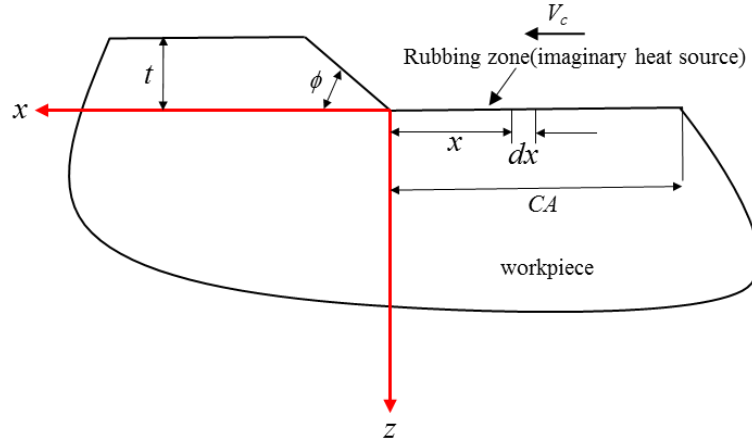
Heat transfer model in the tool-workpiece tertiary shear zone.
